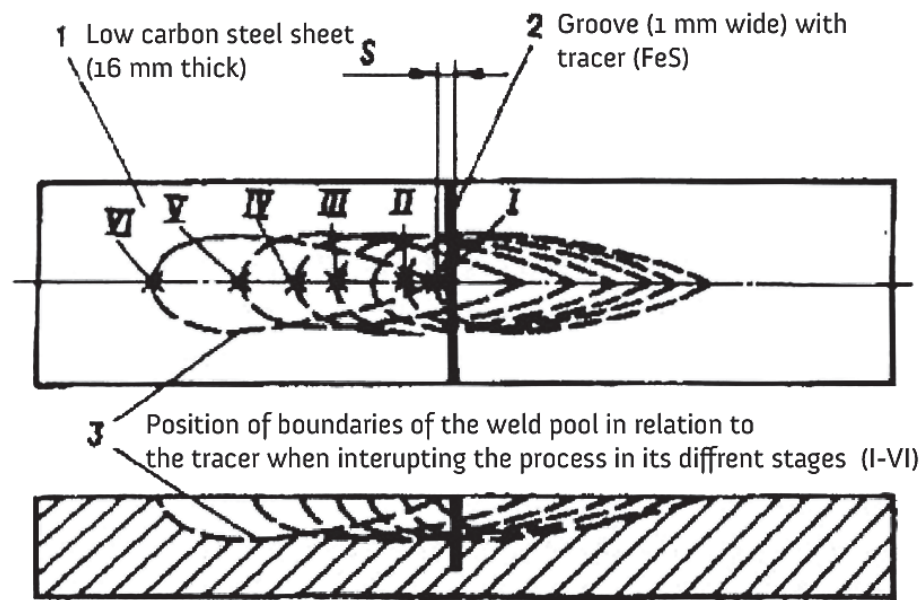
Experimental setup for determining molten metal flows in the weld pool of SAW. Reprinted Fig. 1 from Kuzmenko et al. [83].
